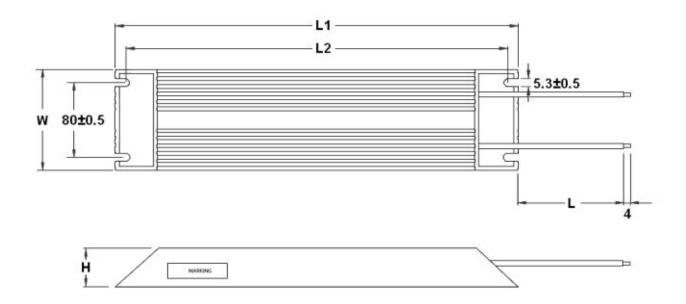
Dimension of regenerative resistor 050100700004
